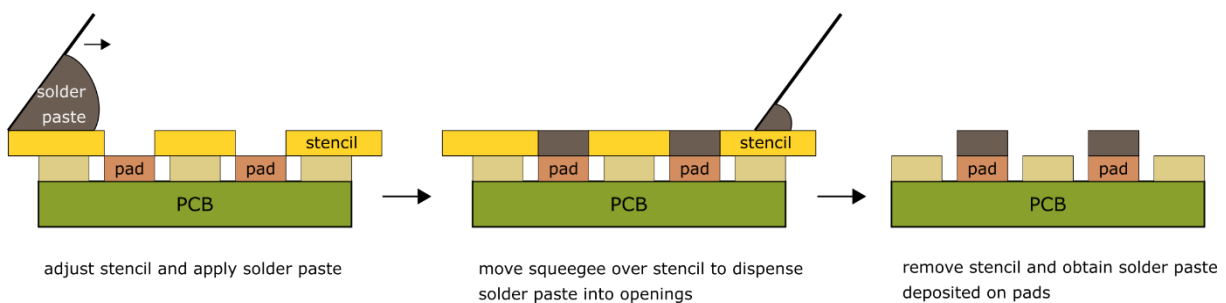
Procedure of solder paste printing process on the PCB surface for reflow soldering.
